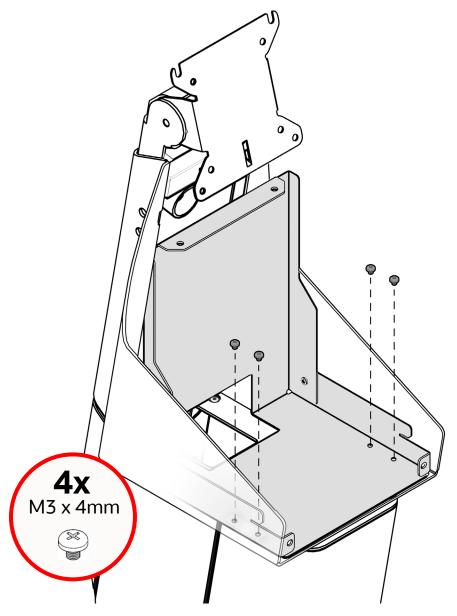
Attaching the enclosure base using 4x M3 x 4mm screws.
